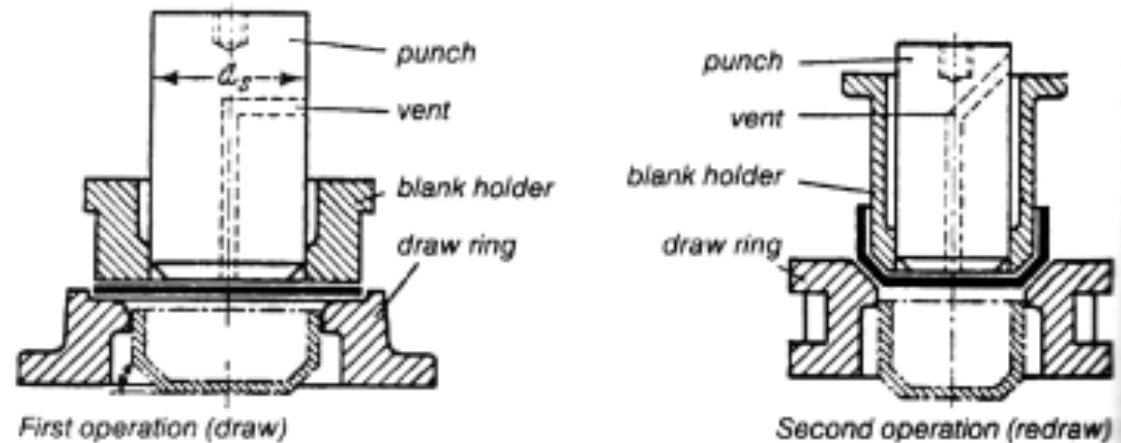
Schematic illustration of deep drawing. For deep drawing, precision sheet (mostly circular blanks) is formed in a lubricated fixture. A blank holder prevents wrinkles from forming. For extra deep draws, the operation can be carried out in successive steps (possibly with an intermediate anneal). d_p = punch diameter. Shown in solid black are (left) the blank and (right) the semifinished deep-drawn part.
